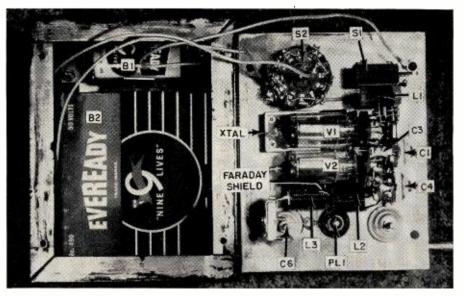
All transmitter parts are mounted on one cover of a 3"x4"x5" utility box. The tube sockets mount on L-shaped brackets. Holes should be drilled in the case opposite C_1 , C_4 , and C_6 for adjustment after the cover is fastened to the box.
